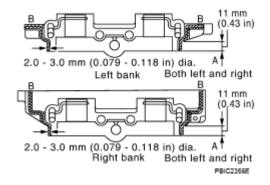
Identifying Mating Surface Of Camshaft Bracket Courtesy of NISSAN MOTOR CO., U.S.A.
